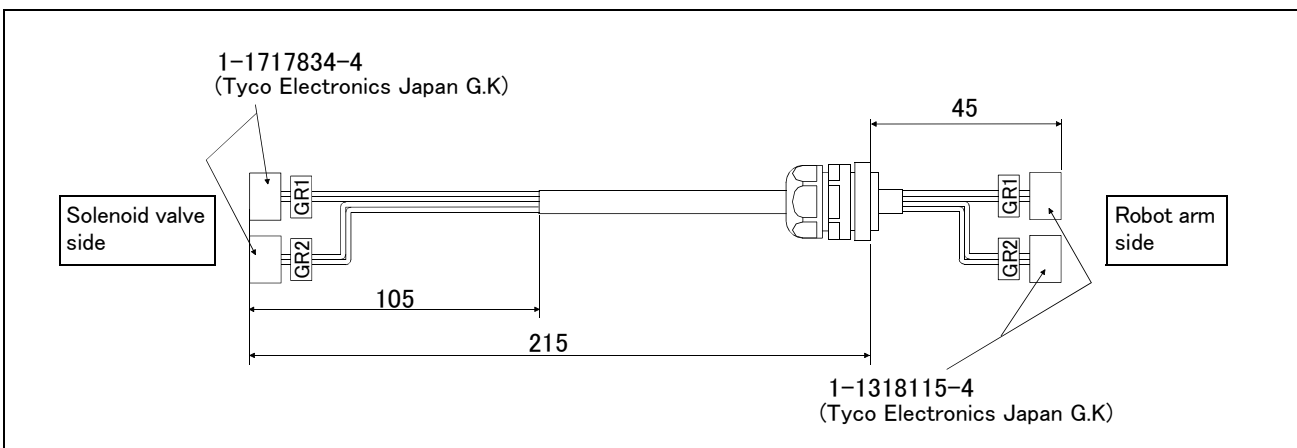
Outside dimensions of hand output junction cable (RH-6SDH series)
